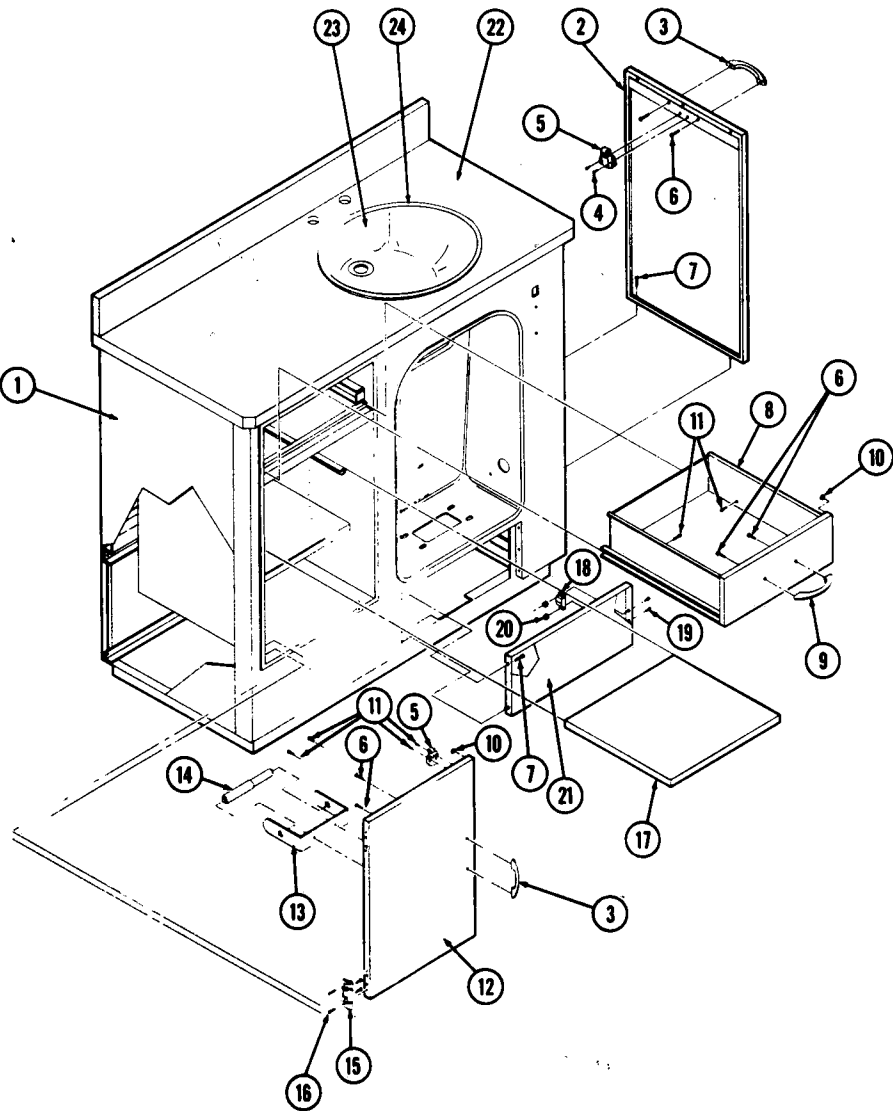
CABINET BODY ASSEMBLY: Model H2000 (BA07).
